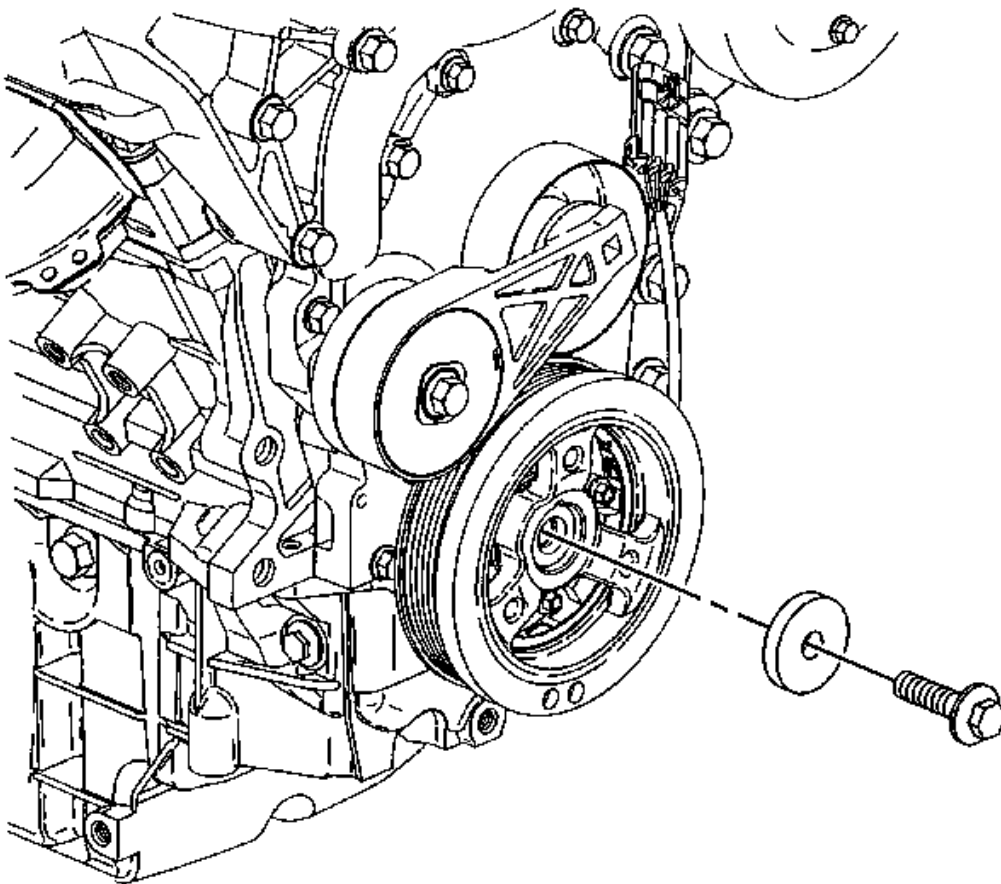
Identifying Crankshaft Balancer Bolt & Washer
